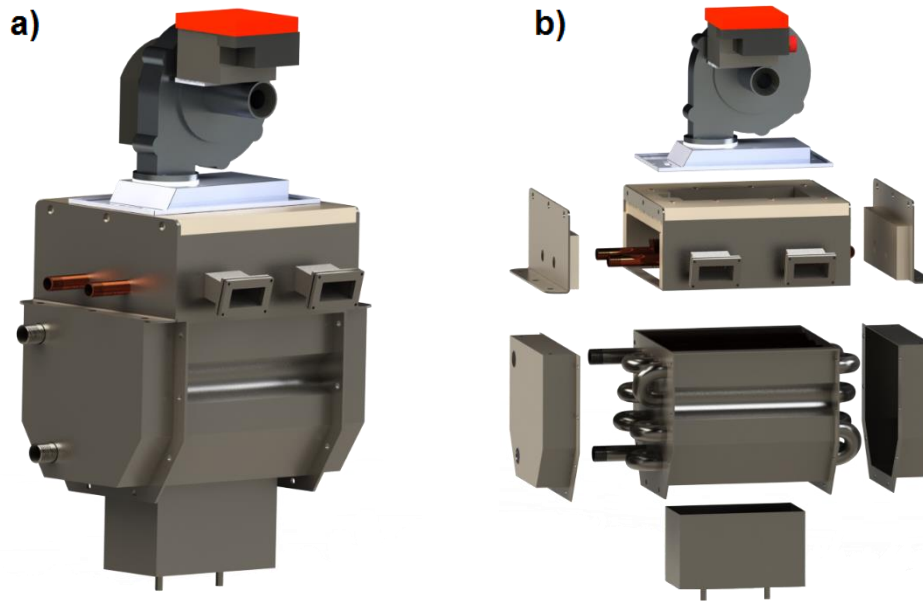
Schematic representation of the ORC-evaporator: a) collapse and b) exploded view.
